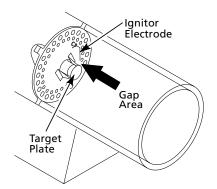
Clearance Between Ignitor Electrode and Target Plate
